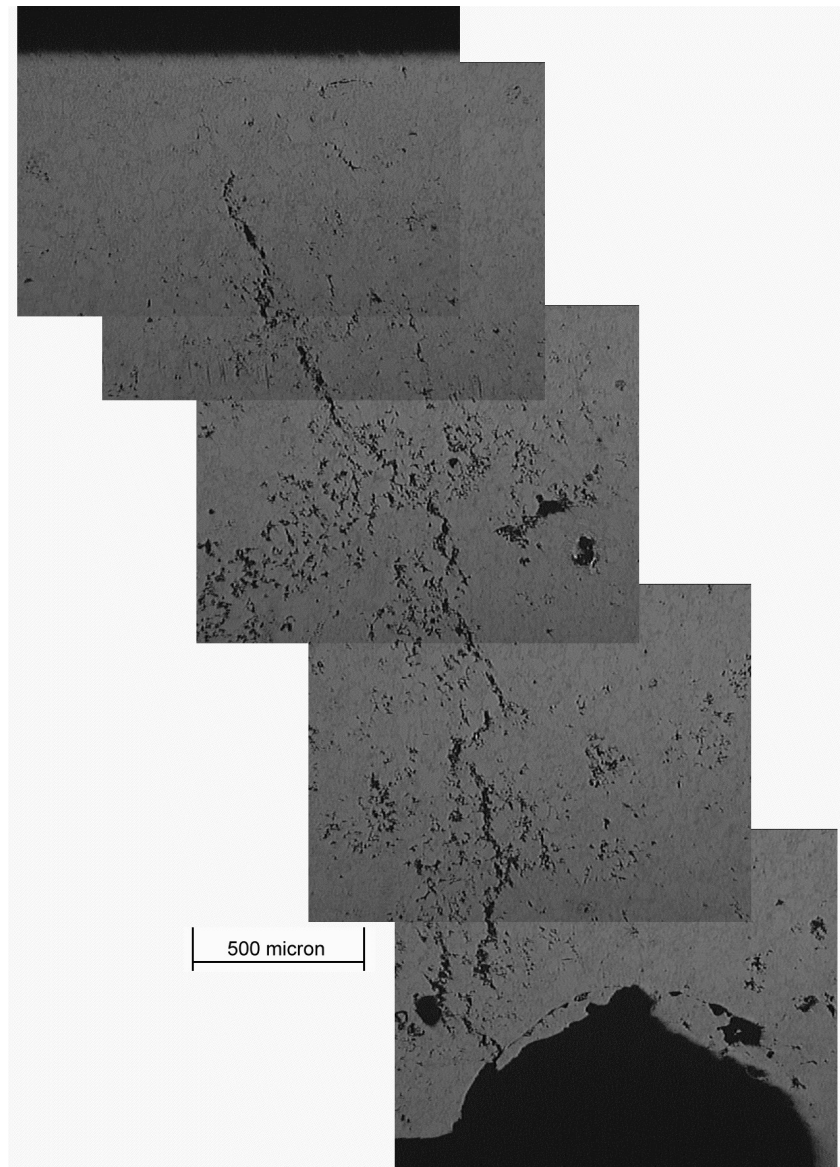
Small Crack Running Through Casting Near Base of Lug.
